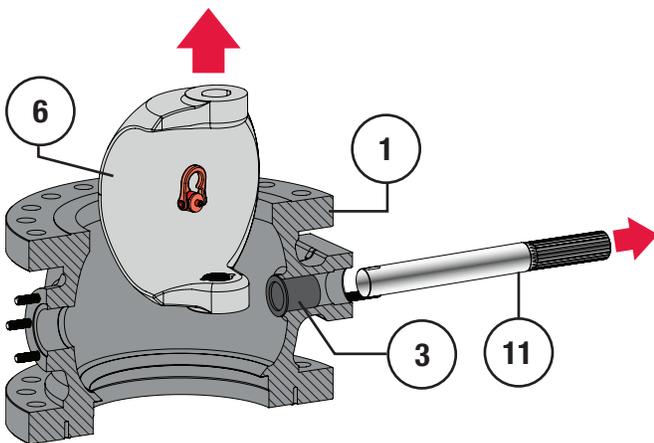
16 to 24" NPS Ball/Follower Shaft Removal
